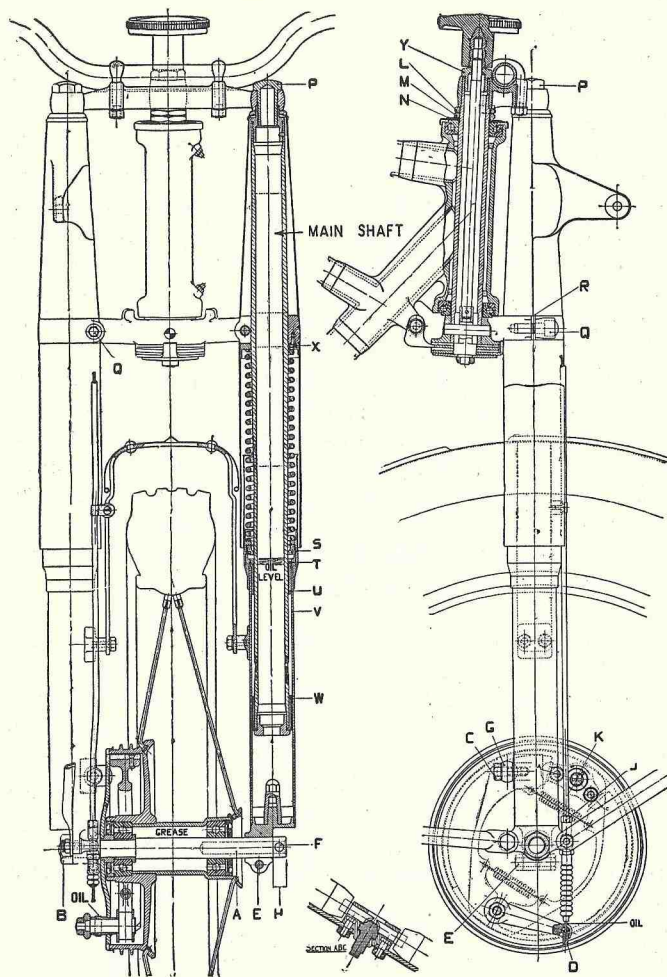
THE 1947-55 ARIEL TELESCOPIC FORK WITH HYDRAULIC CONTROL. THE 1952-55 SPEEDOMETER MOUNTING IS NOT SHOWN.
